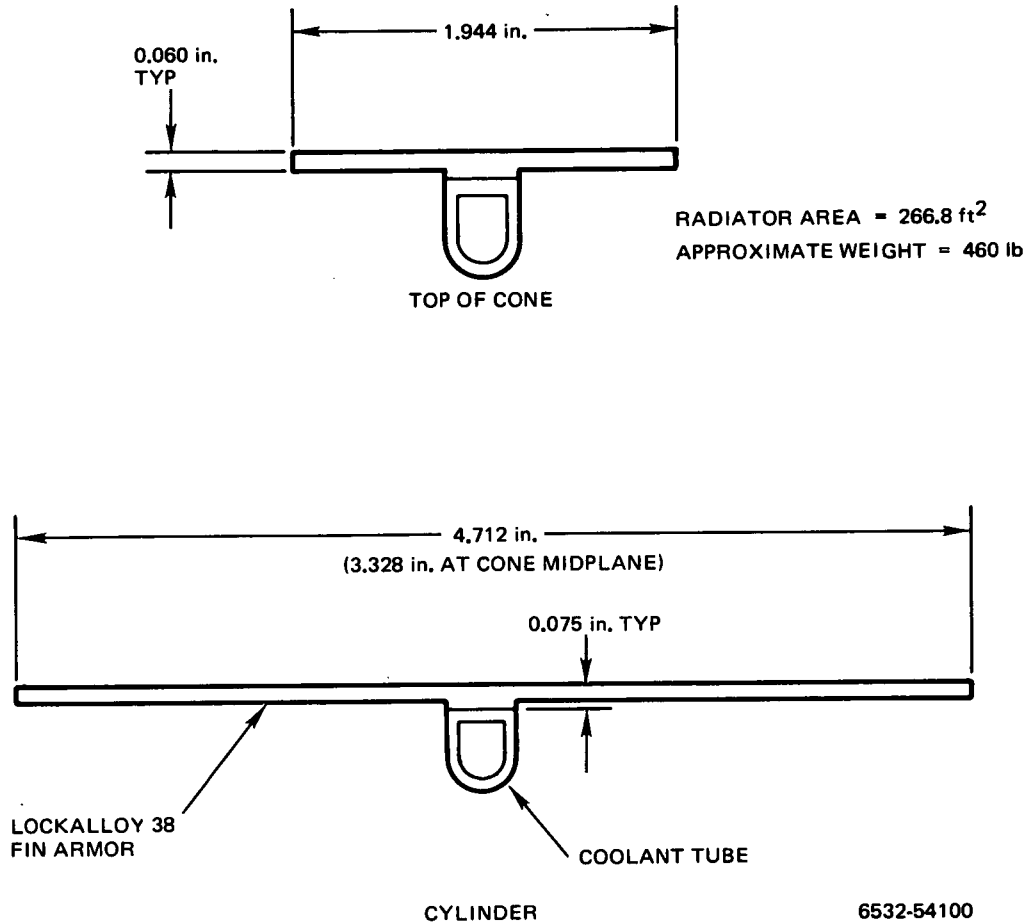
Reference Constant Thickness Lockalloy 38 Fin and Stainless-Steel Tube Cross Section with D-Shaped Coolant Tubes
